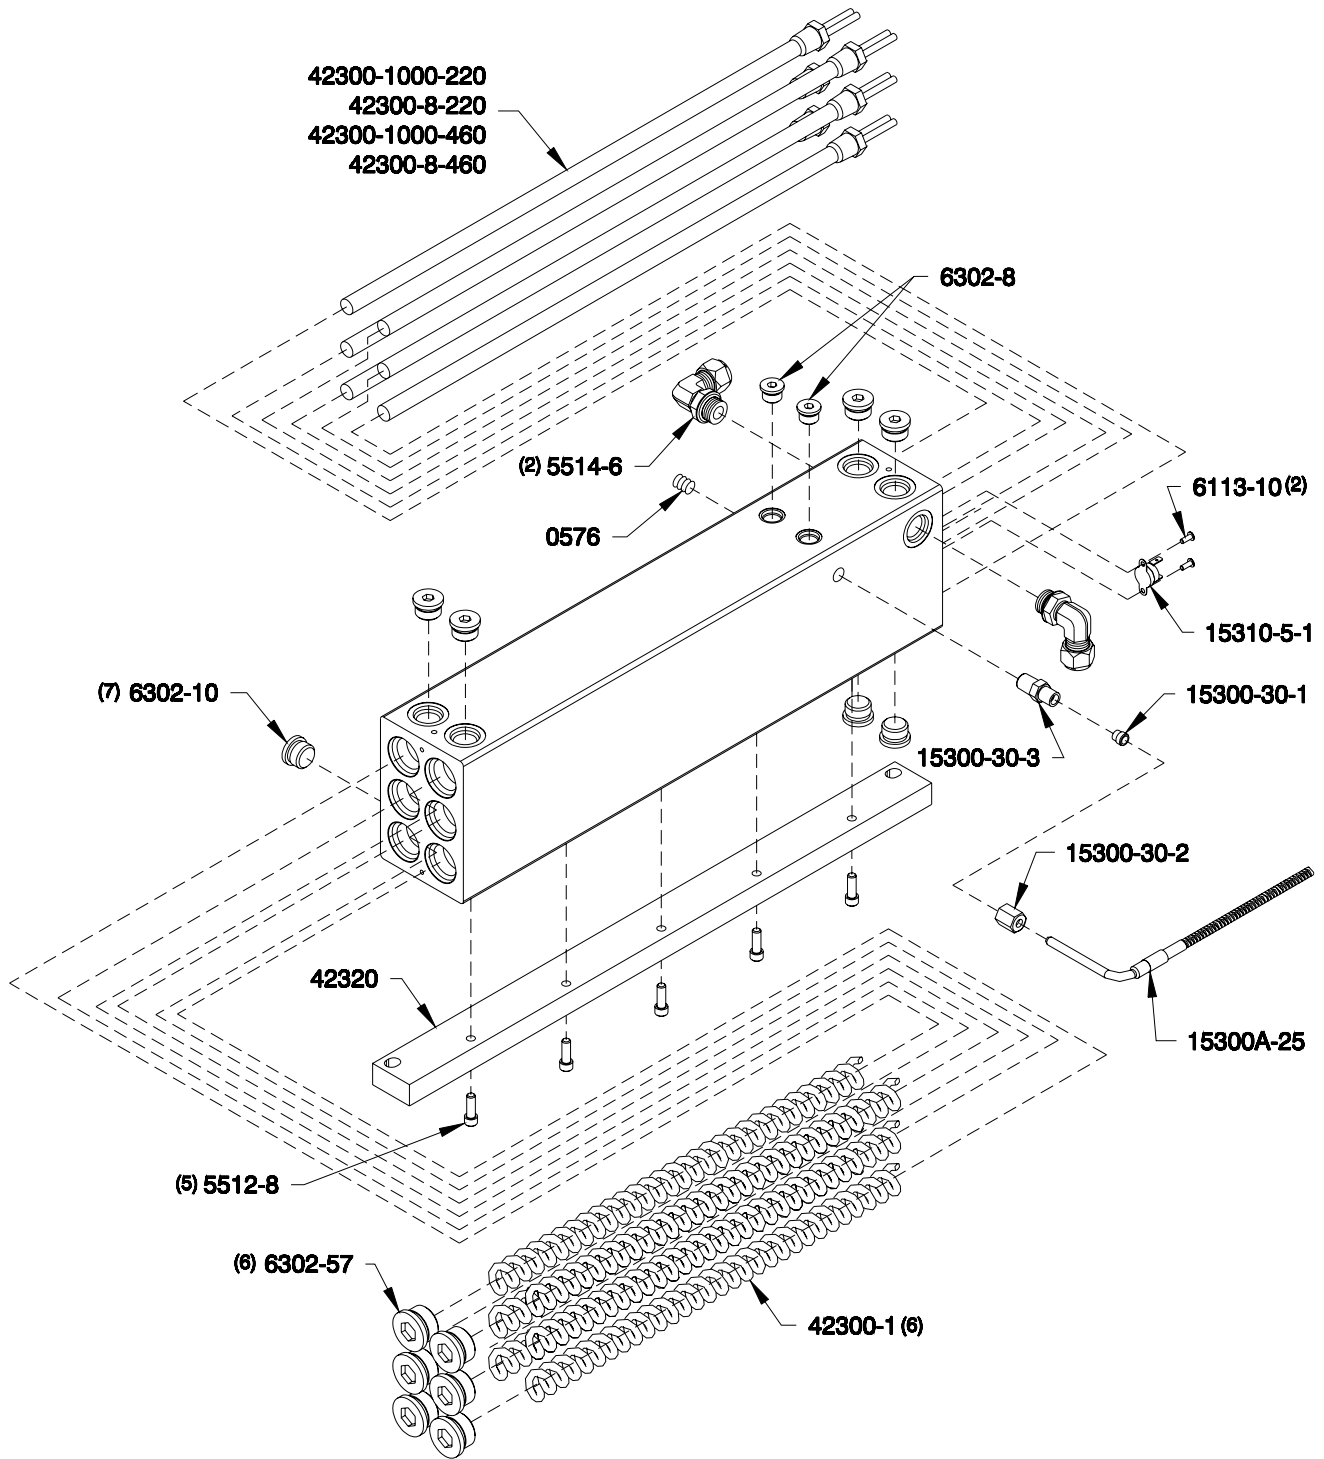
A-Primary Heater Assembly (Part No. 42370-SIZE, 42360-230-9KW, & 66350-460), Exploded View
